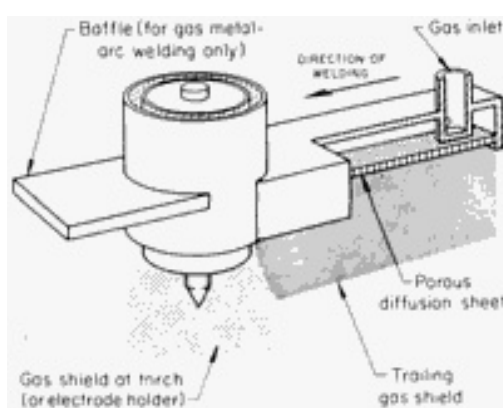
ARRANGEMENT FOR SHIELDED AUTOMATIC WELDING OF TITANIUM ALLOYS IN AIR. THE BAFFLE SHOWN ON THE LEADING SIDE OF THE TORCH (OR ELECTRODE HOLDER) IS SELDOM USED FOR GTAW, BUT
